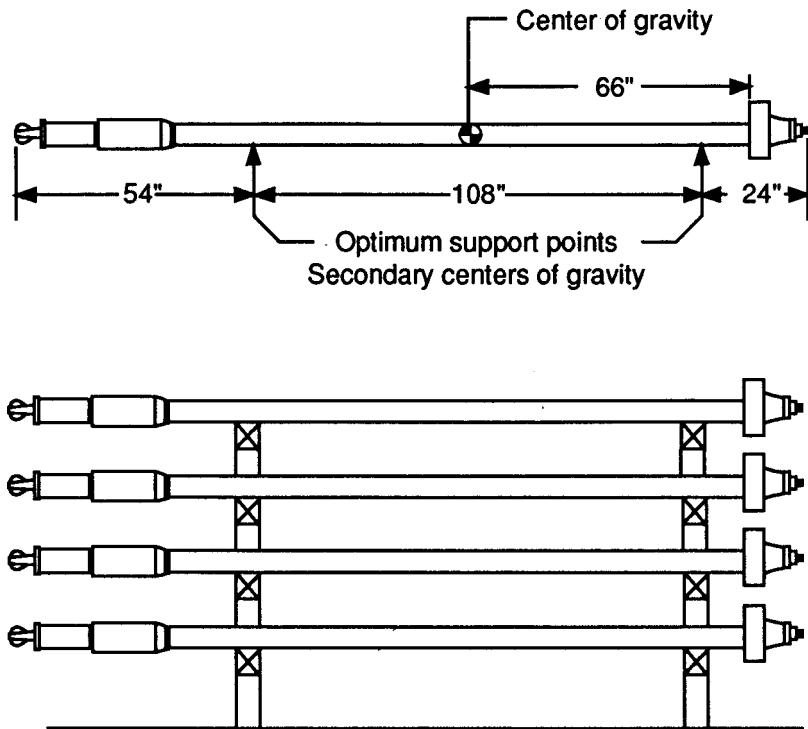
Acceptable control rod drive mechanism storage arrangement.²
